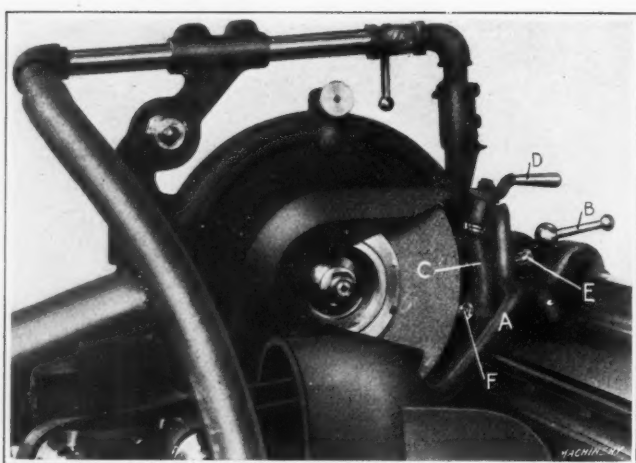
Another Radius Wheel Truing Device for Use on Norton Plain Grinding Machines
